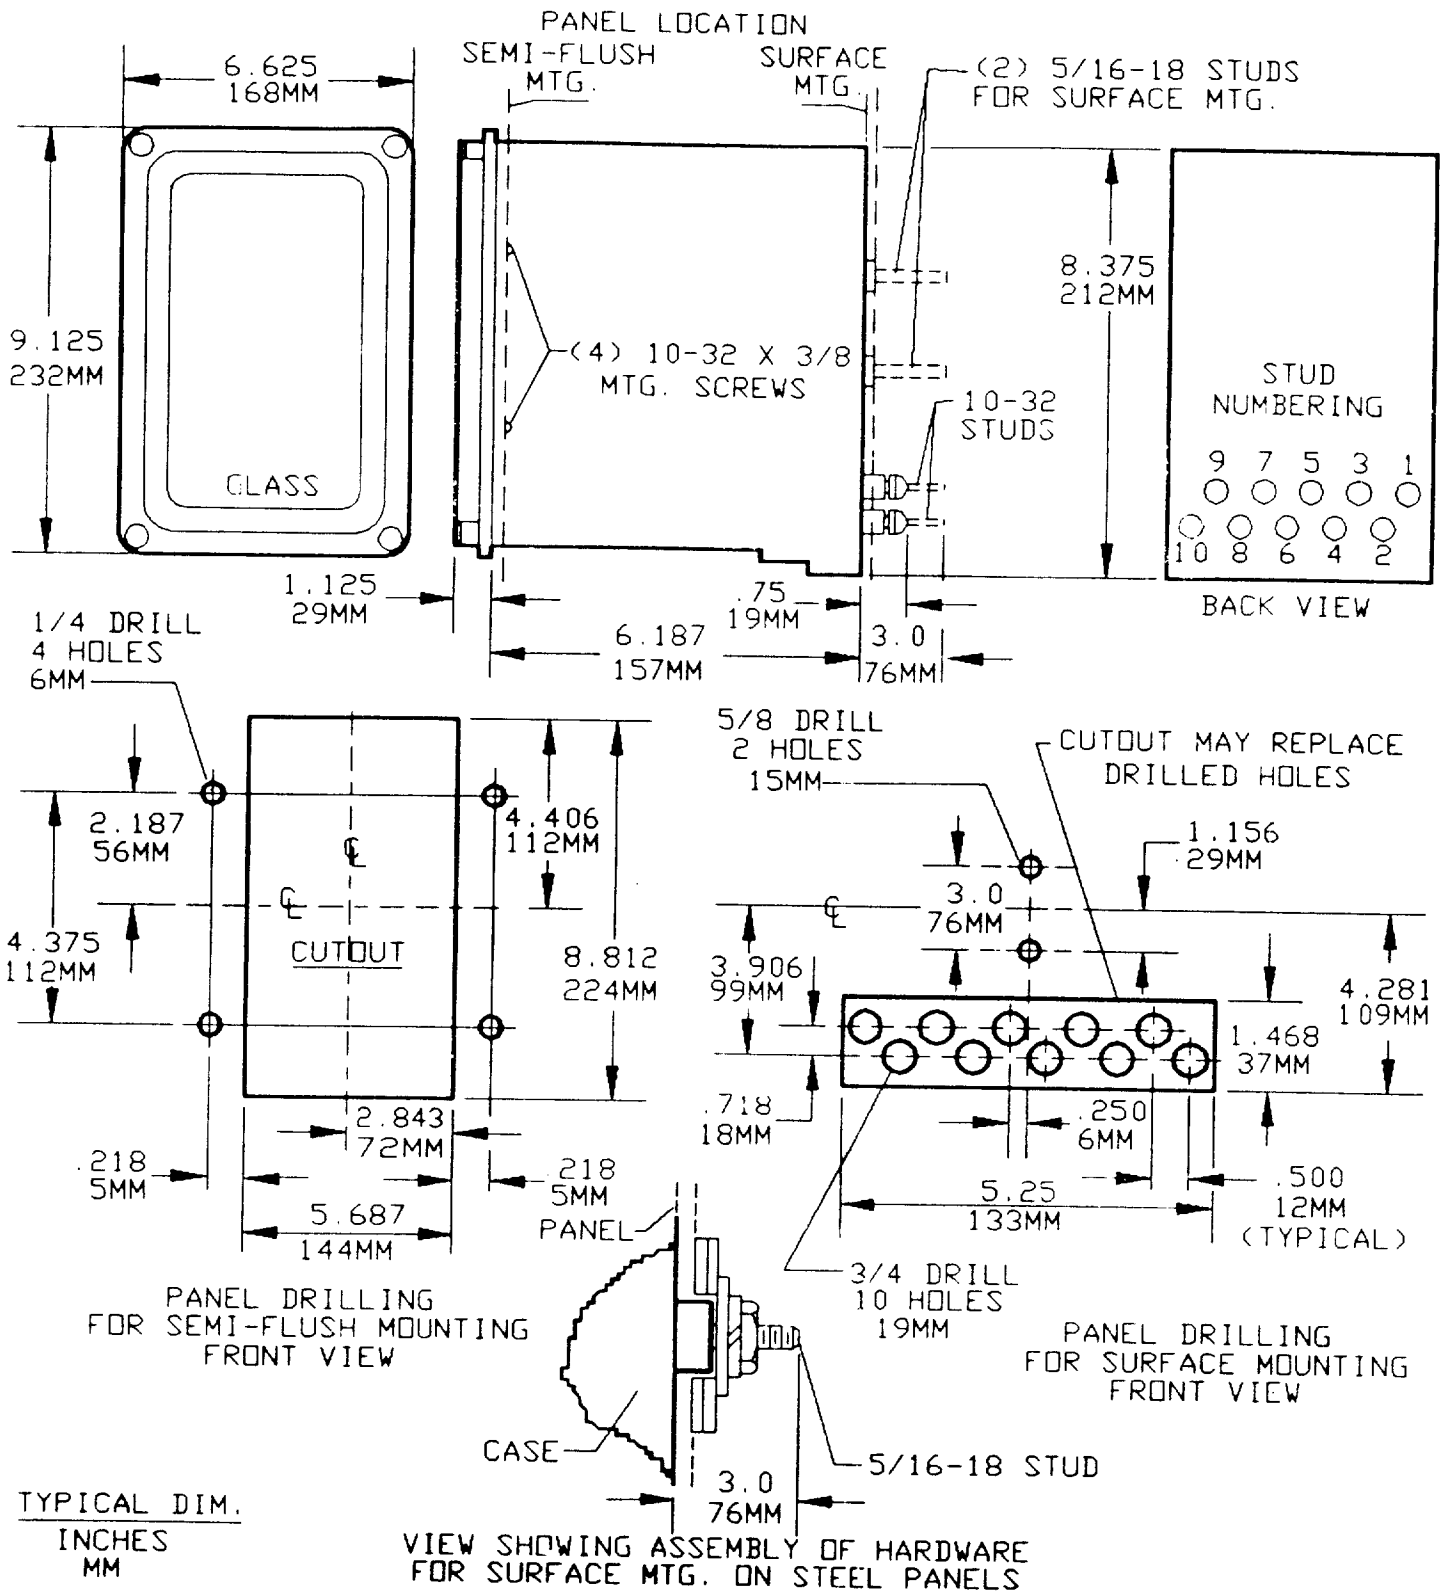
(6209271 [8]) Outline and Panel Drilling Dimensions for Type HGA18M Relay
